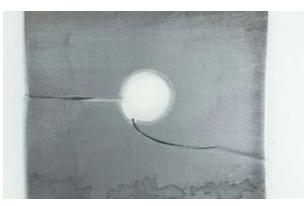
fatigue crack path in the specimen with circular cutout
